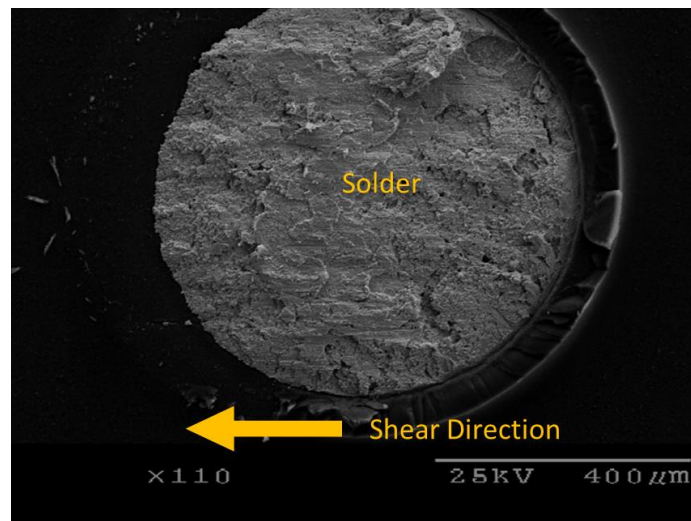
Top view of the fracture surface of the ductile failure
